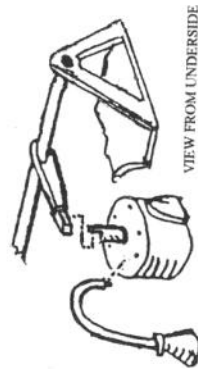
VACUUM CYLINDERS, ASSEMBLY
